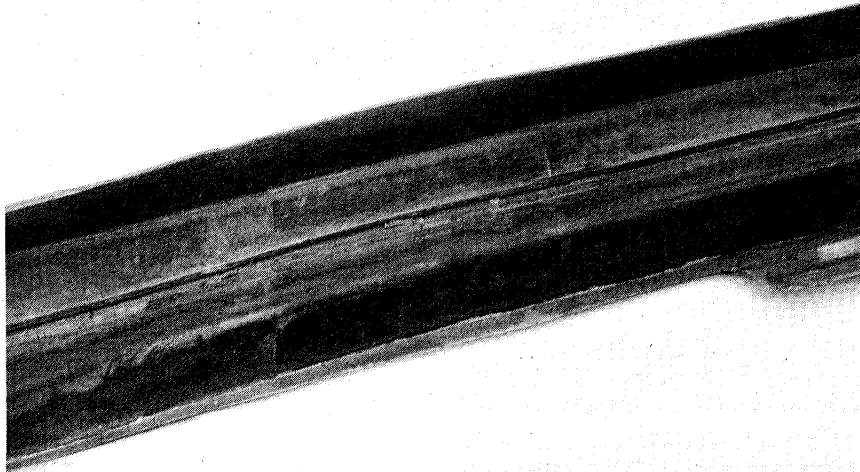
Molded Silicone Rubber Caul Sheet used to Mold Concept "D" Truss Rib Cap in Bead-Up Position
